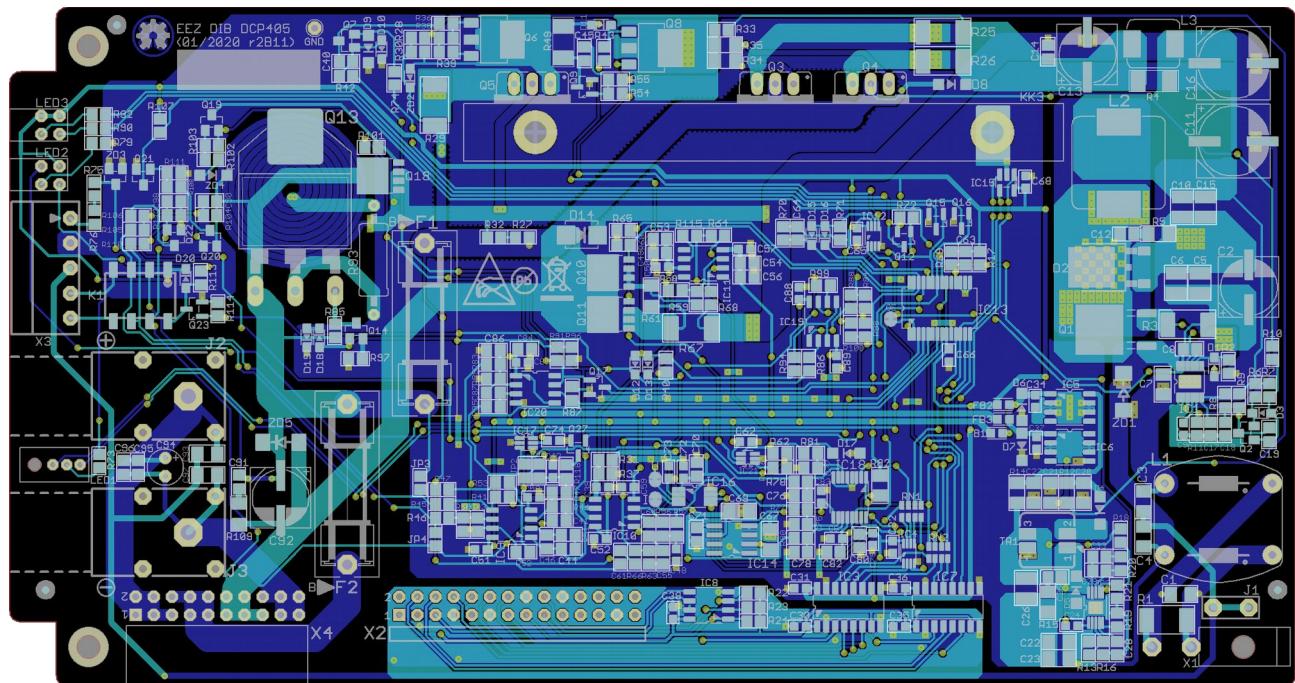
PCB Top (cyan) and bottom (blue) layer
